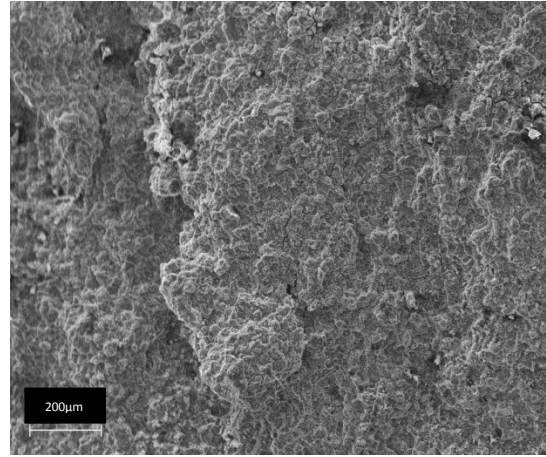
S430 Modified WOL specimen showing intergranular SCC on fracture surface.
